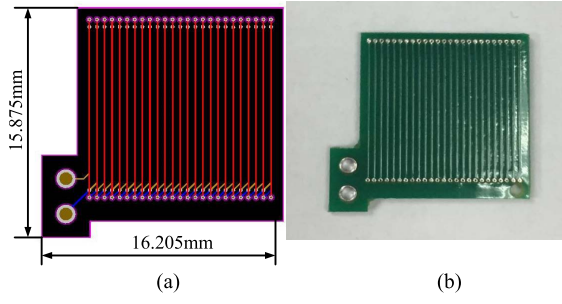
Modified H sensing coils. (a) PCB diagram. (b) Product.
